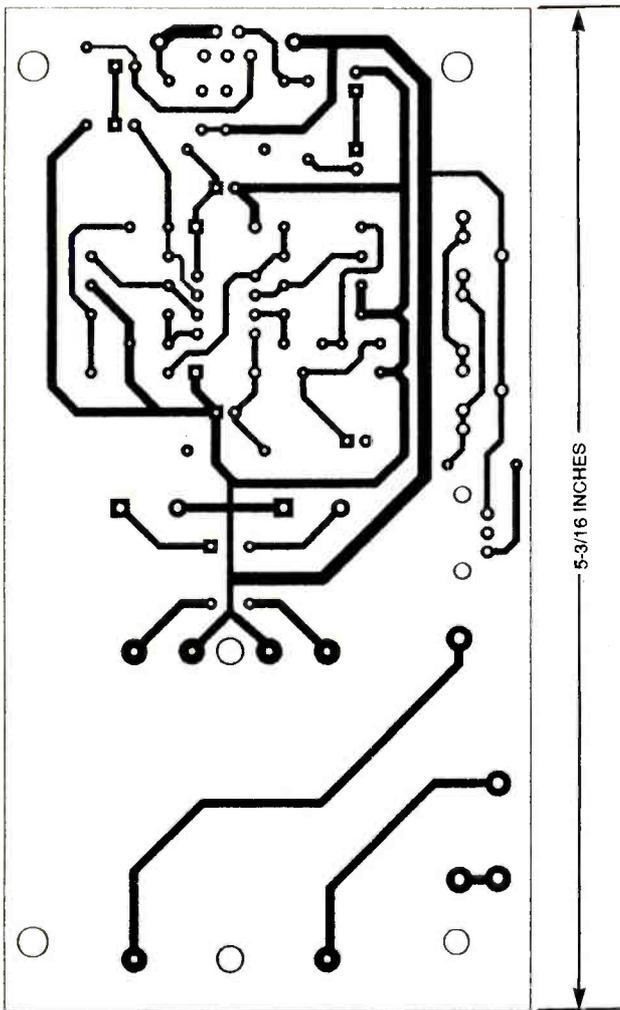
This is a template of the component side of the Subwoofer PC board, shown full size.
